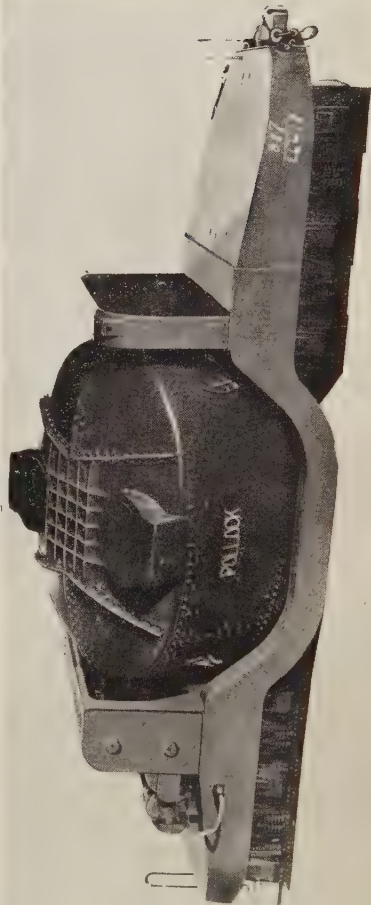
125-Ton Mixer-Type Hot-Metal Ladle. (Courtesy of the Wm. B. Pollock Company.)
